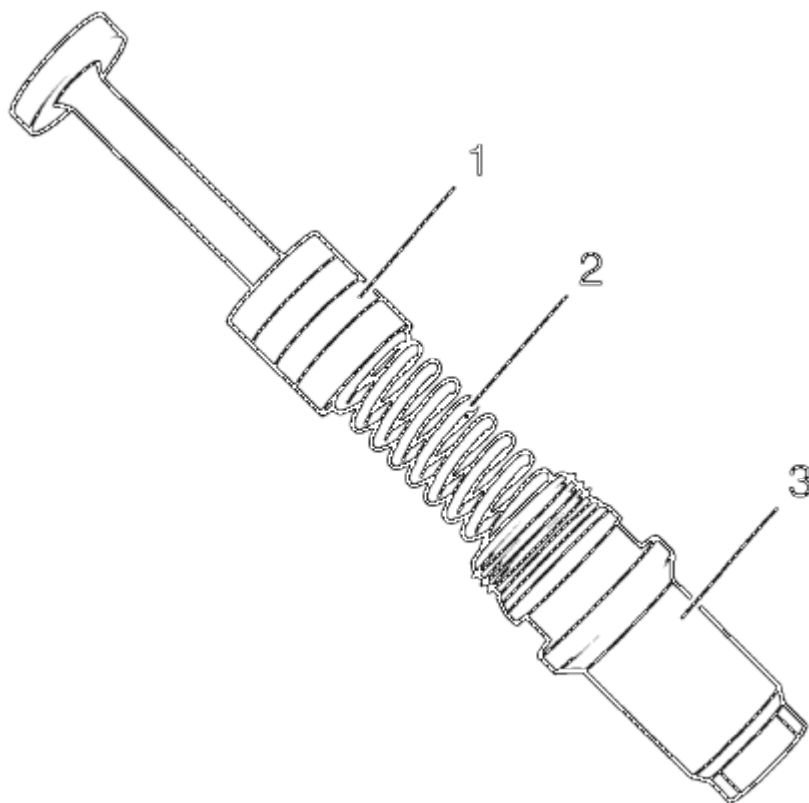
Piston, Spring And Oil Pressure Relief Valve Closure Bolt
